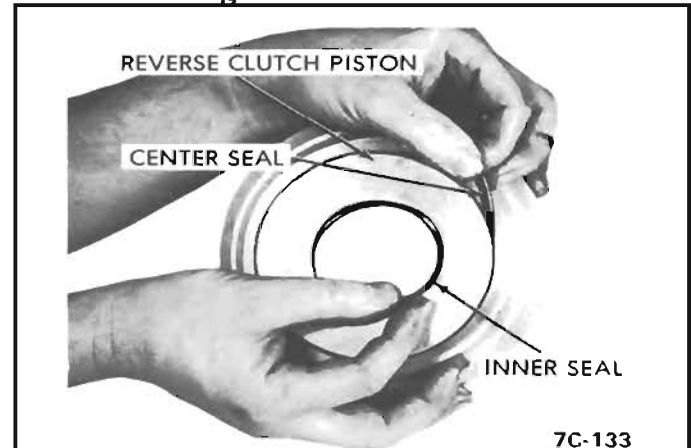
Reverse Clutch Piston Center & Inner Seal Removal
